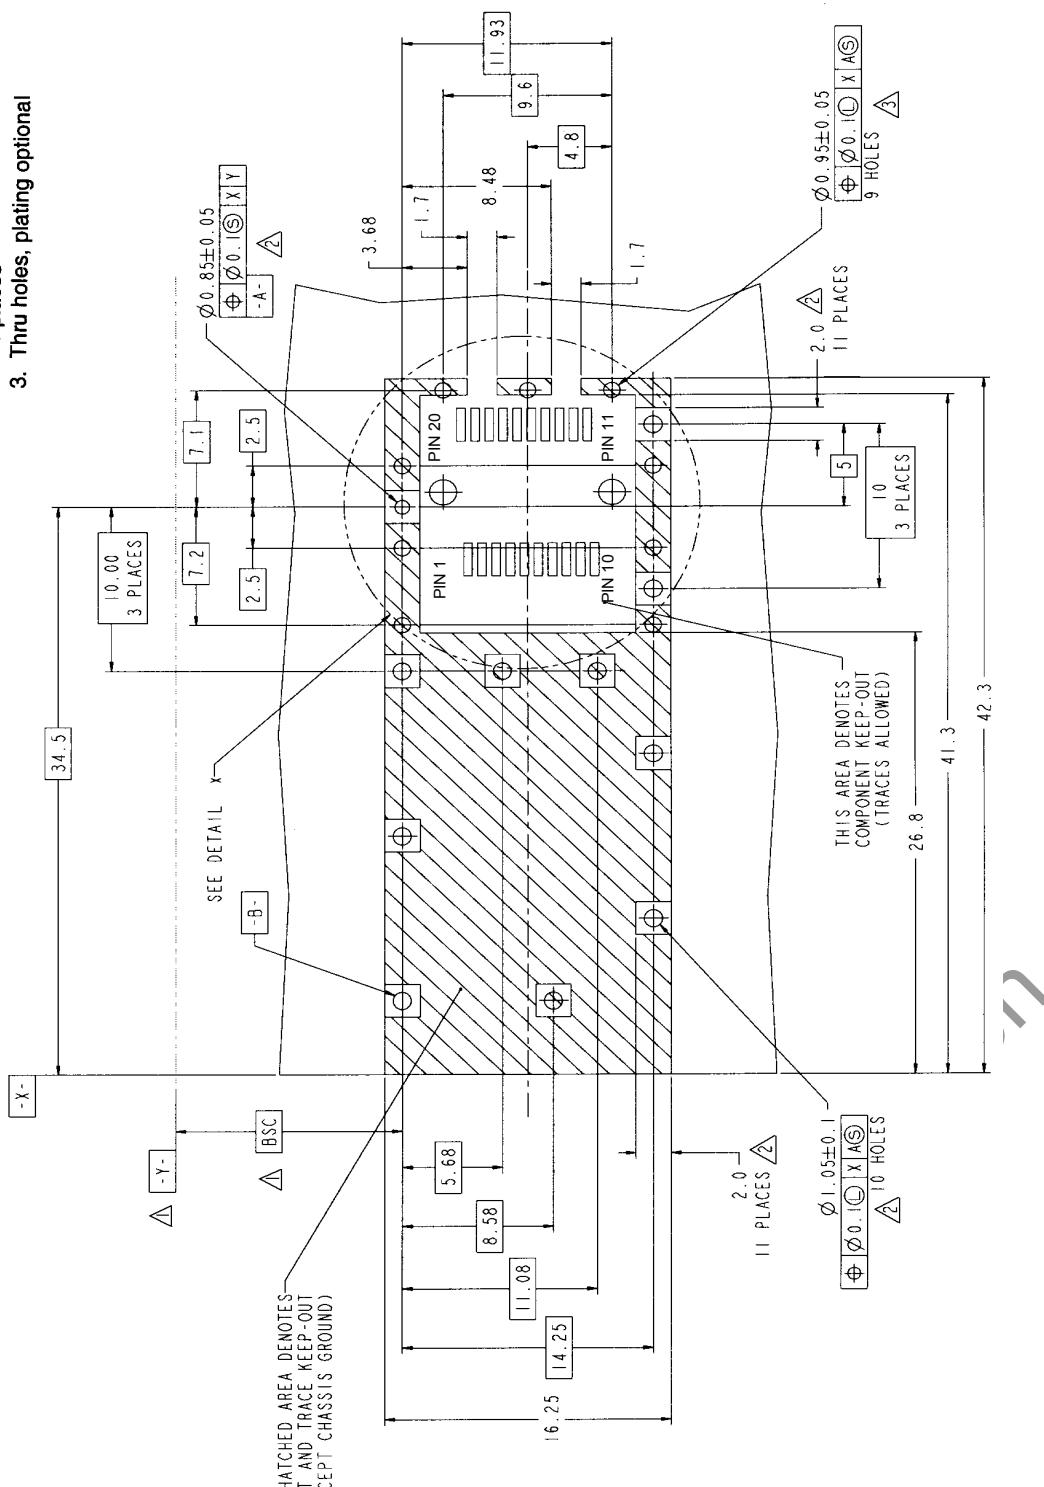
SFP Host Board Mechanical Layout (Cont.)
